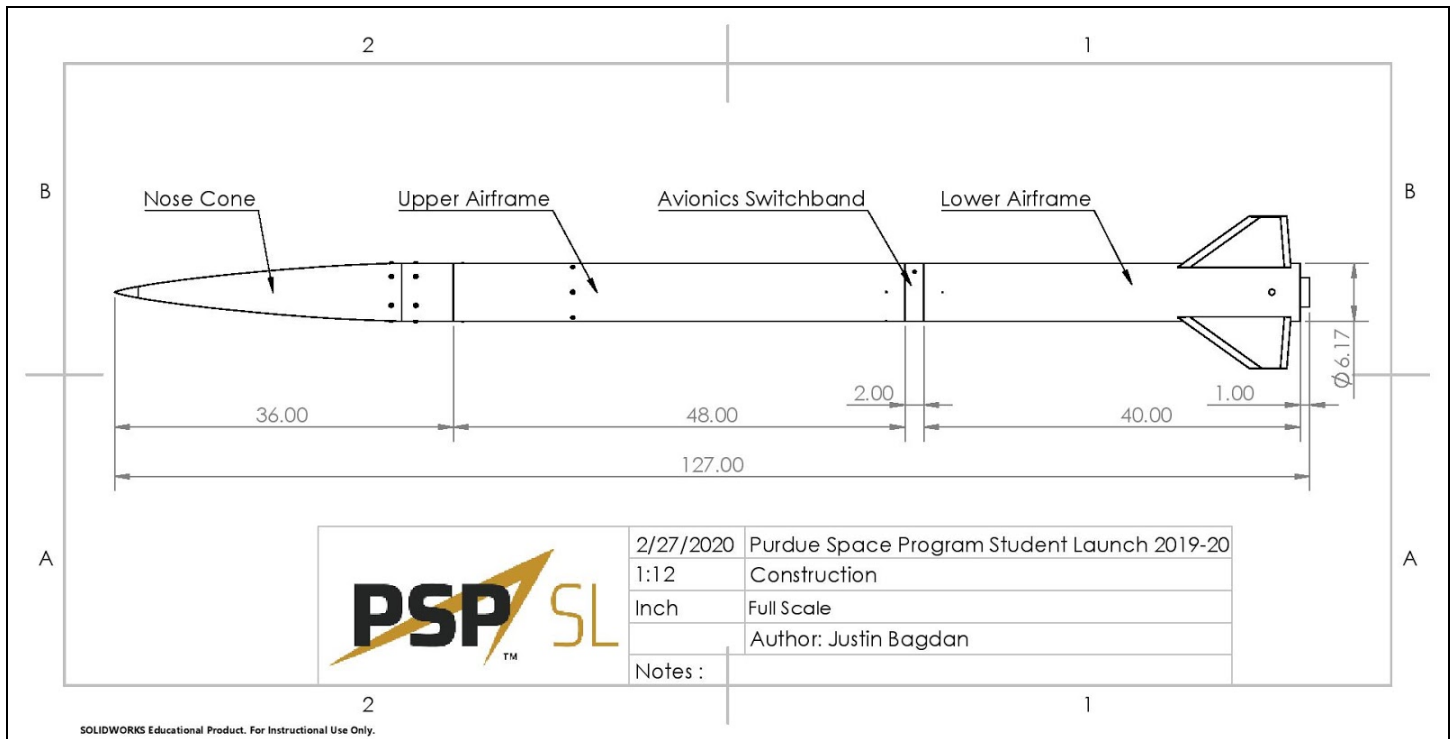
Assembled Launch Vehicle Dimensional Drawing
